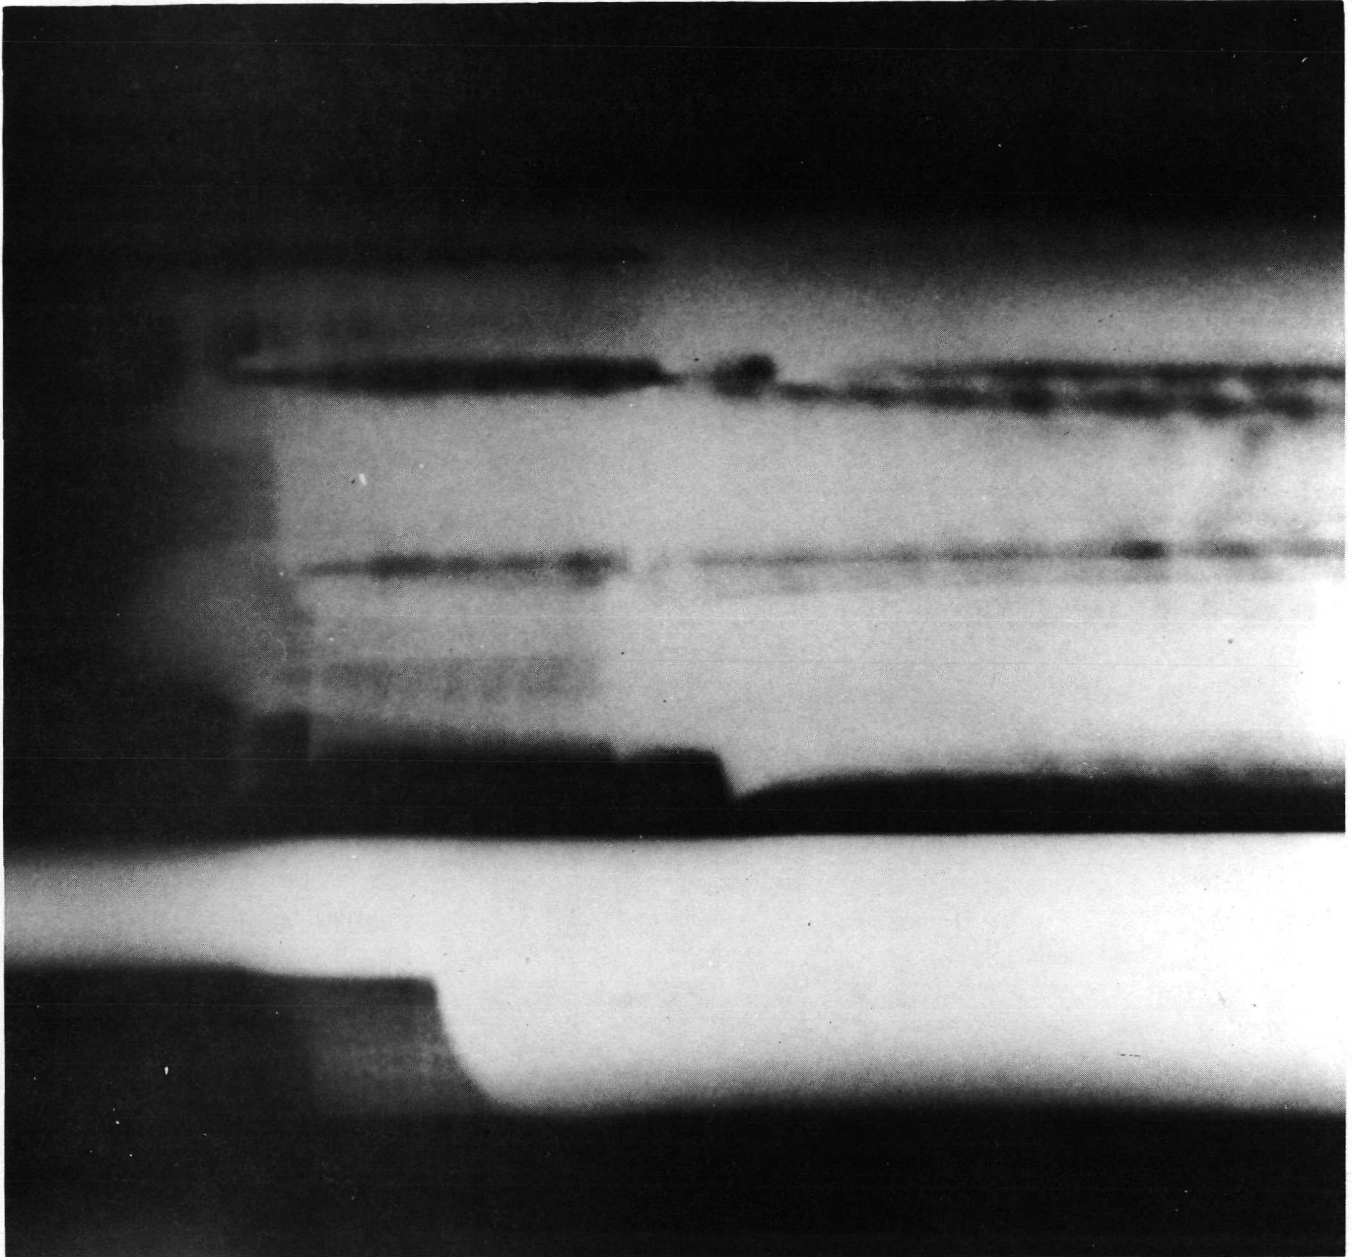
FLASH X-RADIOGRAPH OF TURBINE WHEEL ASSEMBLY
